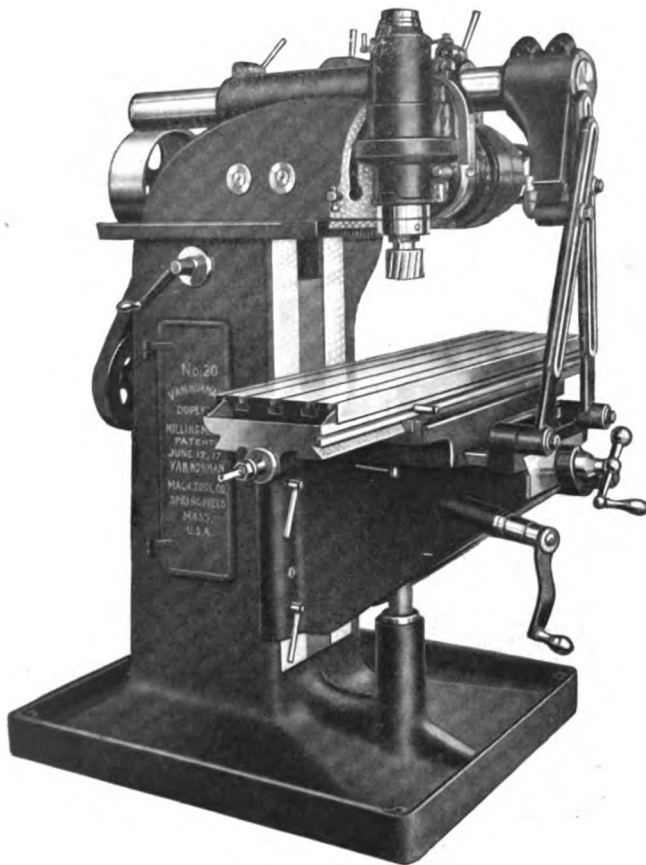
Showing the No. 20 machine with Ram extended over the table and Cutter Spindle set in vertical position.
